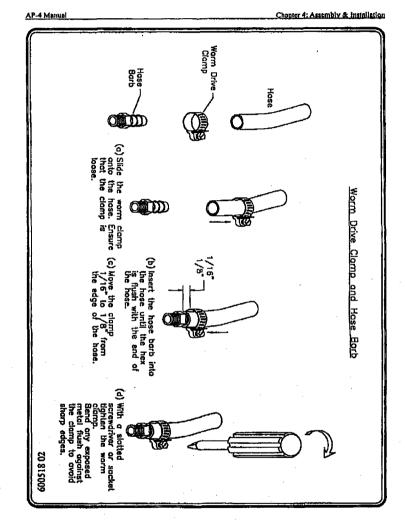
Worm Drive Clamp and Hose Barb Assembly Instructions
